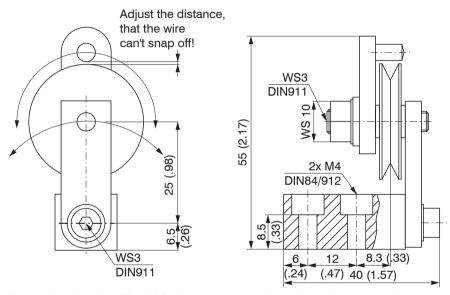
Guide pulley TR1-WDS with mounting socket, dimensions in mm (inches), not to scale
